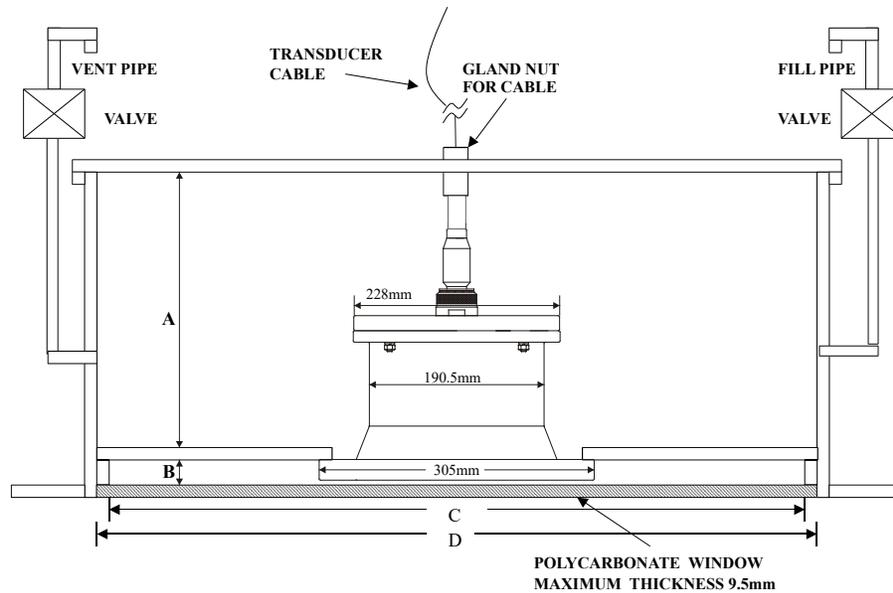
Inside Vessel Mounting - OS 150 kHz Flanged Transducer
